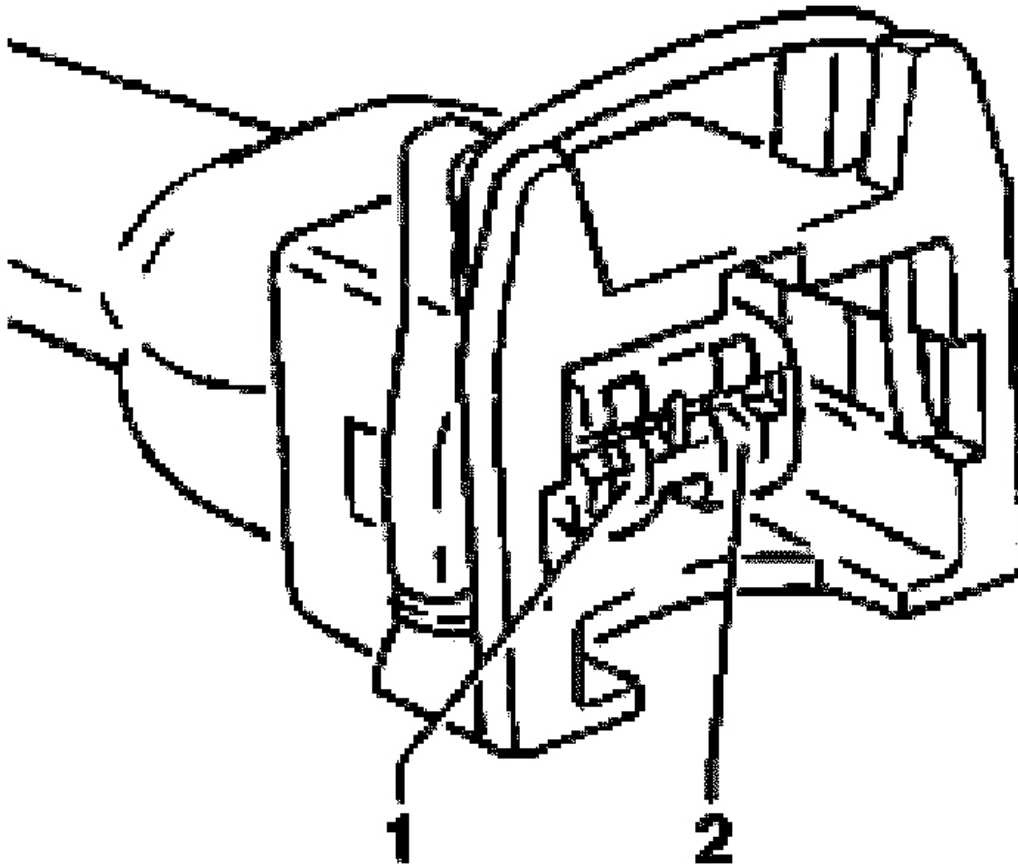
Identifying Solenoid Valve For Camshaft Adjustment Harness Connector Terminals
